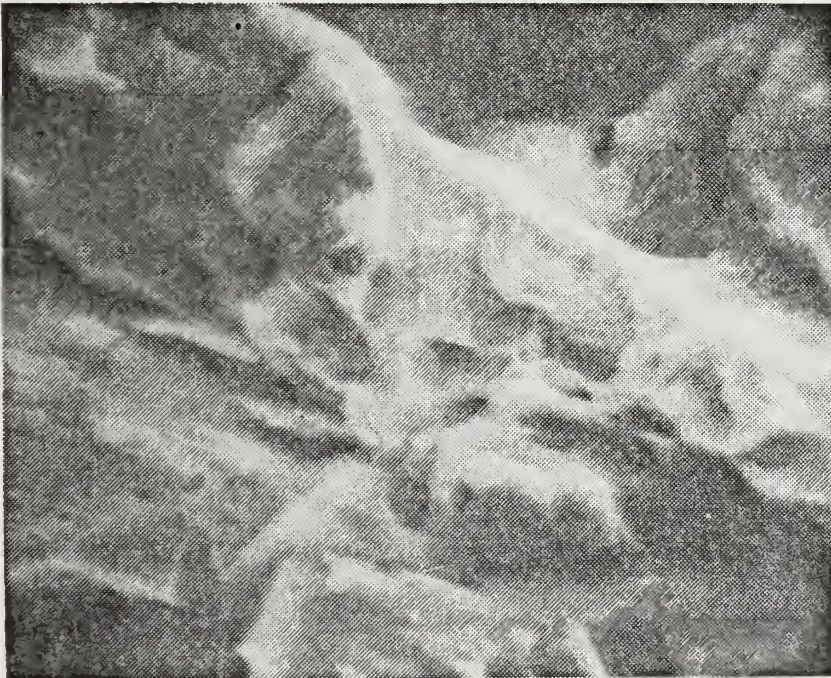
Higher magnification view of Fig. 63, showing dimples oriented in the direction of crack initiation on a transgranular fracture. X5000.
